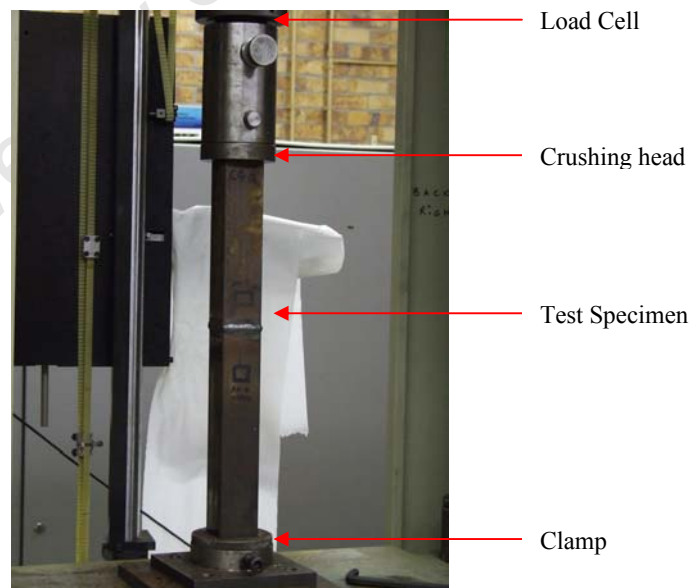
A welded specimen ready for quasi-static crushing in the Zwick testing machine.
